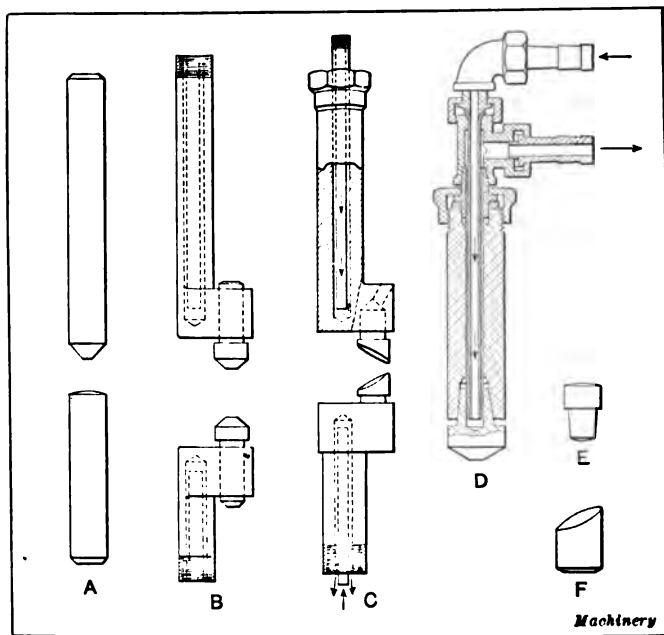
Method of holding and cooling Electrode Points on Electric Spot-welding Machines
